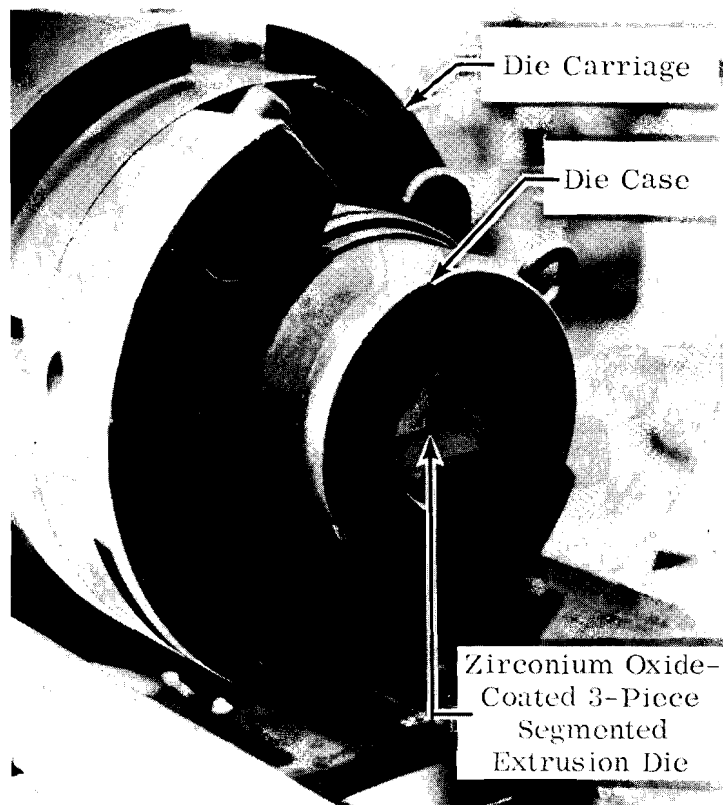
VIEW OF EXTRUSION DIE SETUP IMMEDIATELY BEFORE LOCKING INTO THE EXTRUSION PRESS
